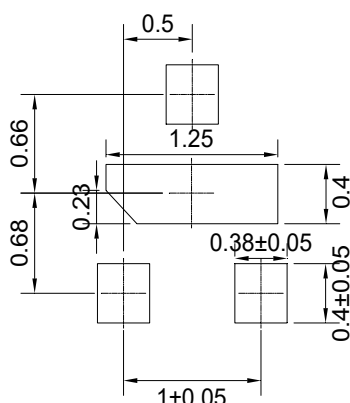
footprint of the sensor chips with DFN1616H055-4L package(unit: mm).
